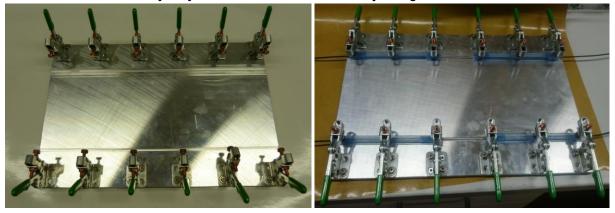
One of the gluing jig for the light bars open and closed/equipped
